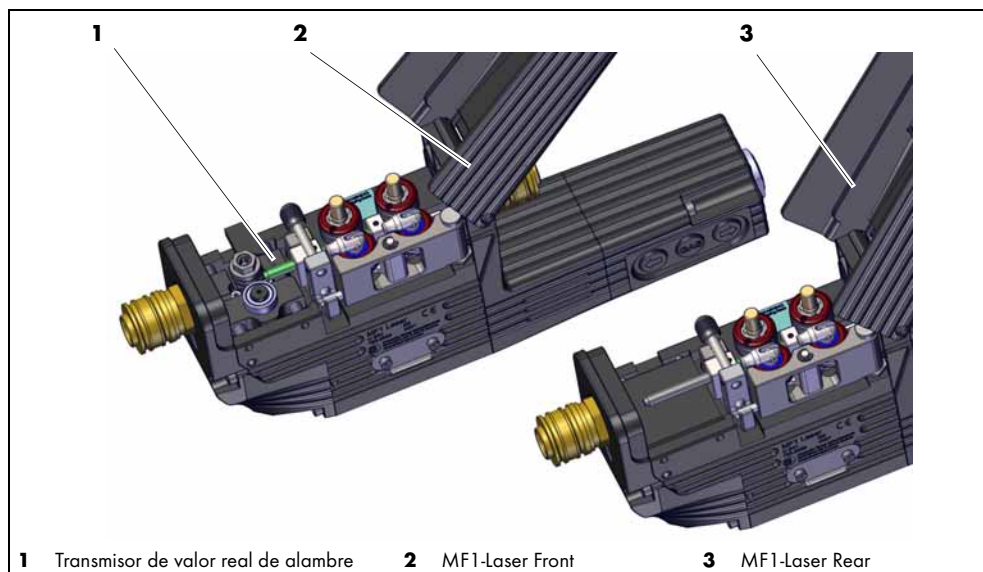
MF1-Laser Front/MF1-Laser Rear
